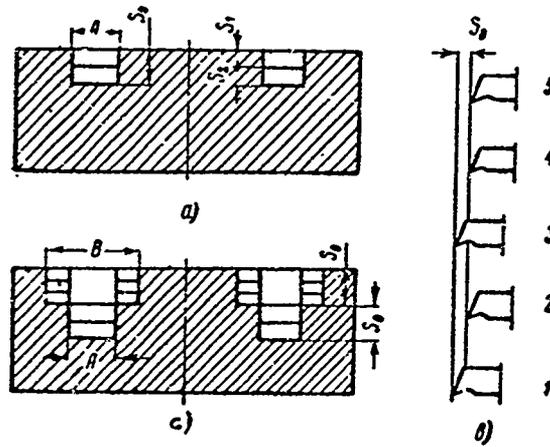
Schematic of shaving divisions by depth and feed during deep-hole ring drilling by a five-cutter head
